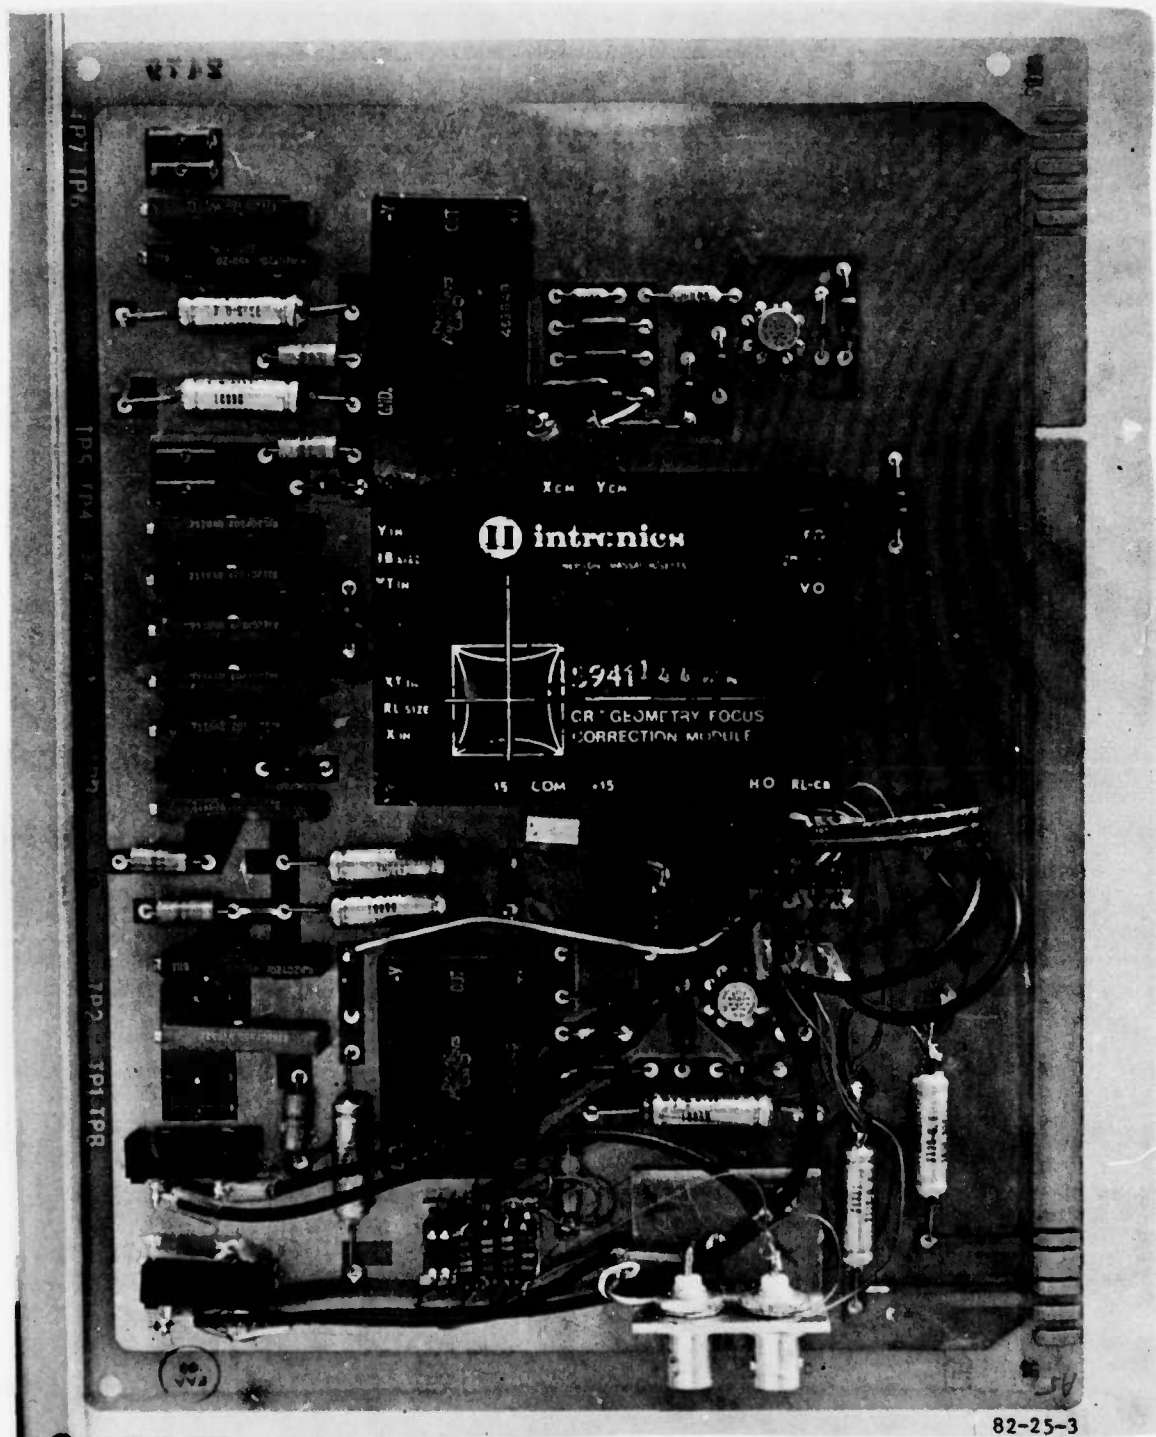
MODIFIED A5 PCB — SWITCH PVD
